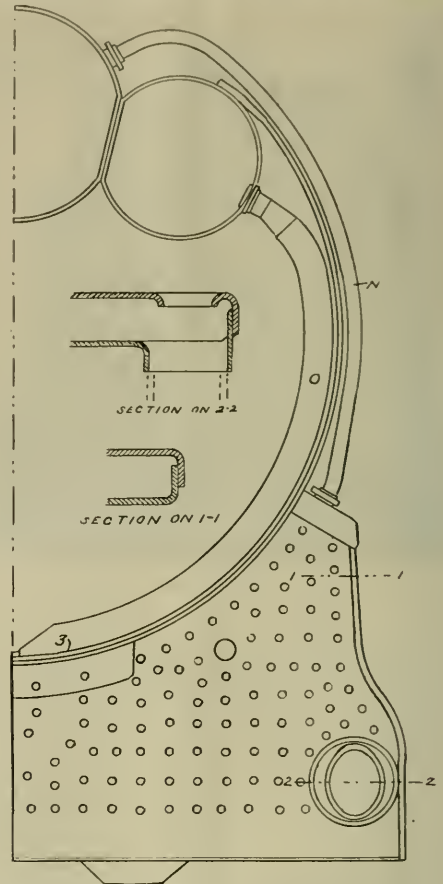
Half Cross-Section of McClellon Water Tube Boiler Showing Combustion Chamber and Throat Sheet
